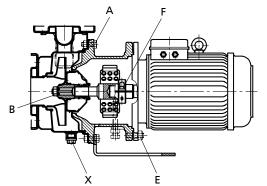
Tightening points for Etachrom B 050-025-125.1, 050-025-125, 050-025-160, 050-025-200, 050-032-125.1, 050-032-125, 050-032-160, 050-032-200, 065-040-125, 065-040-160, 065-040-200, 065-050-125, 065-050-160
